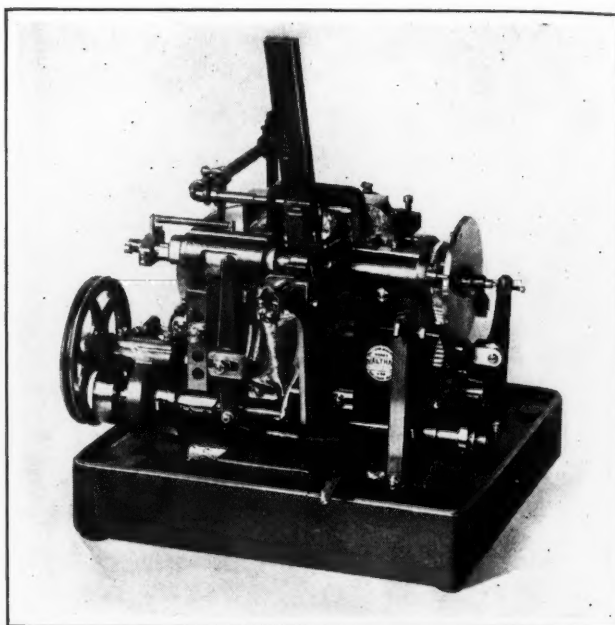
Waltham Automatic Pinion and Gear Cutting Machine with Magazine Feed
